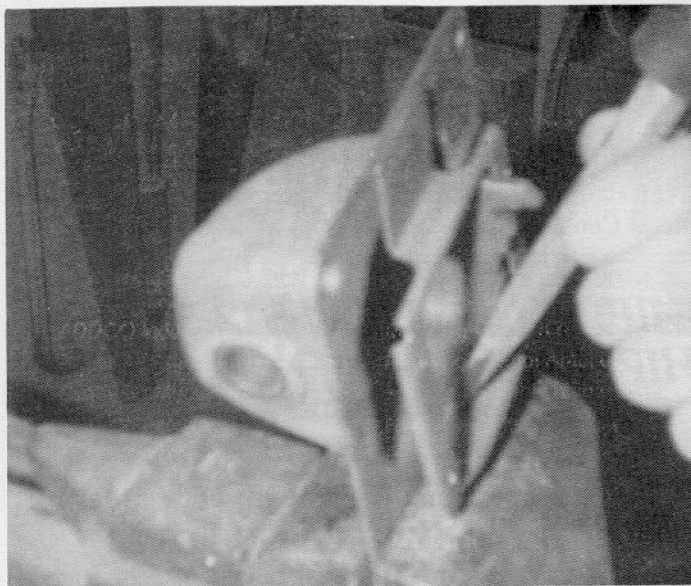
Inside location of the chisel helps hold distortion to a minimum. FIGURE 2 — Grind weld areas smooth.
